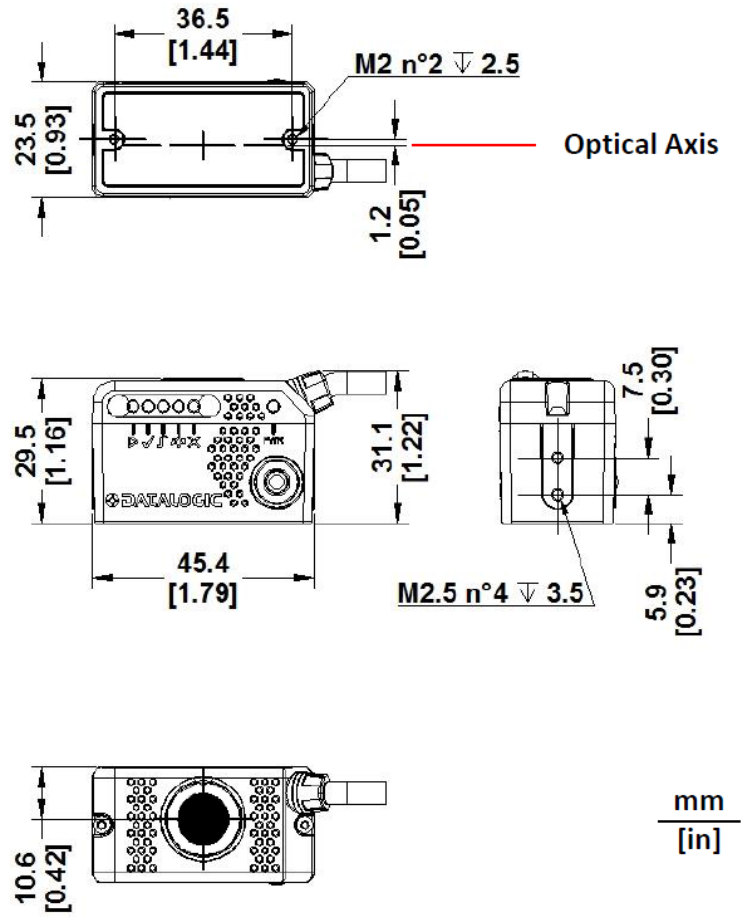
Matrix 120 311-205 mechanical dimensions
